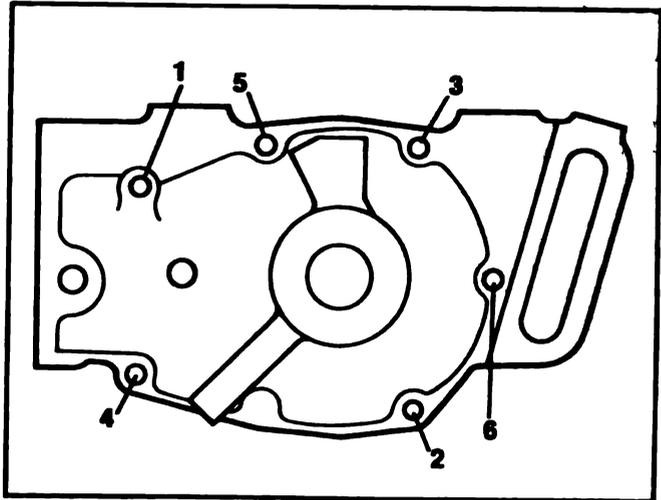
The Tightening Sequence For The Water Pump With Idler Pulley.
